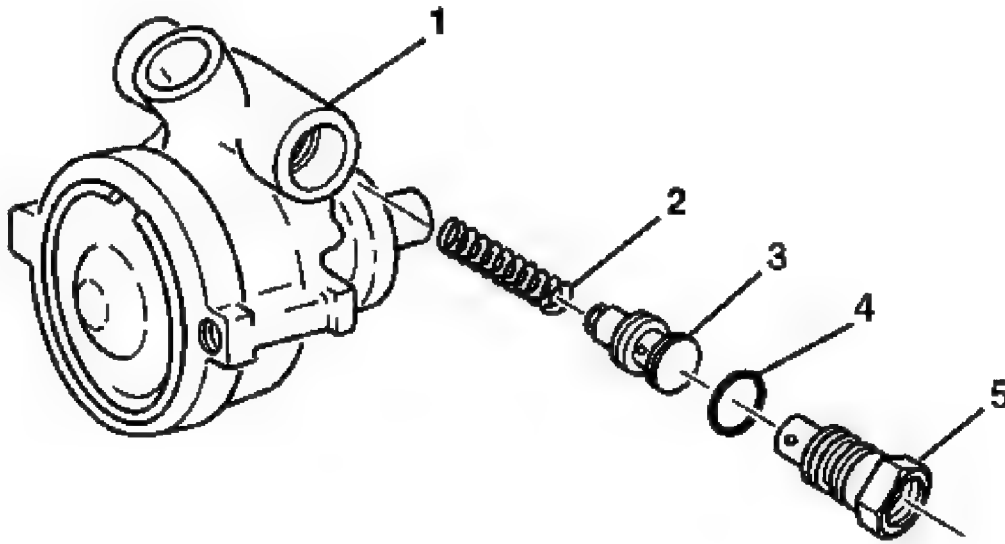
Exploded View Of Power Steering Pump Flow Control Valve (CB Series)
